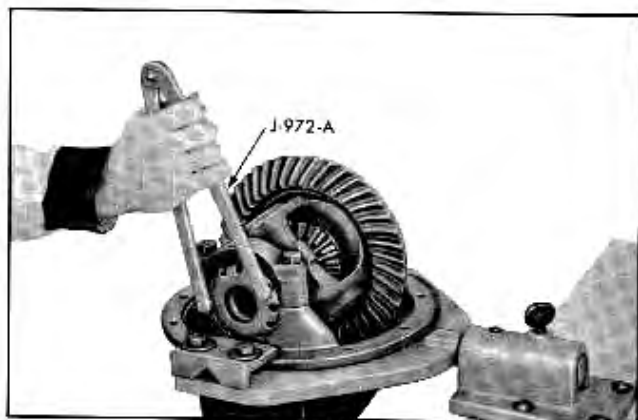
Turning Adjusting Nuts With Wrench J-972-A
